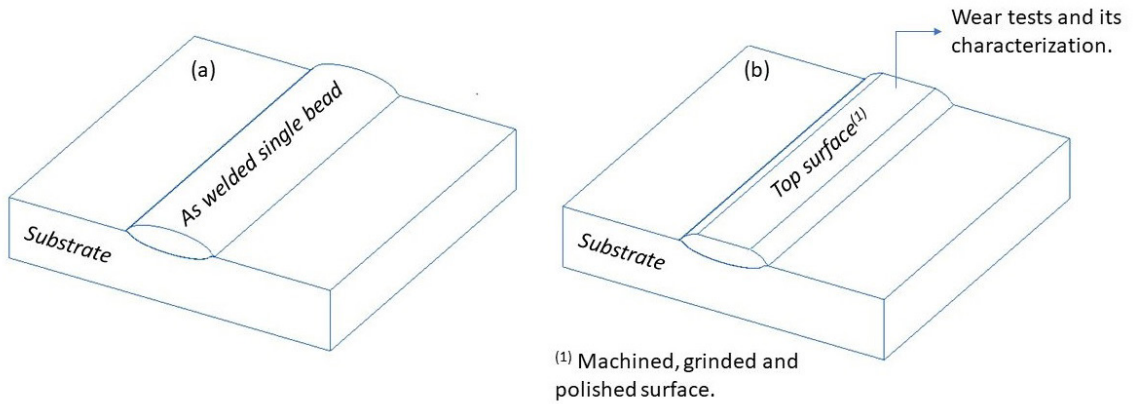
Schematic view of the as-deposited single bead (a) and the machined top surface (b).
